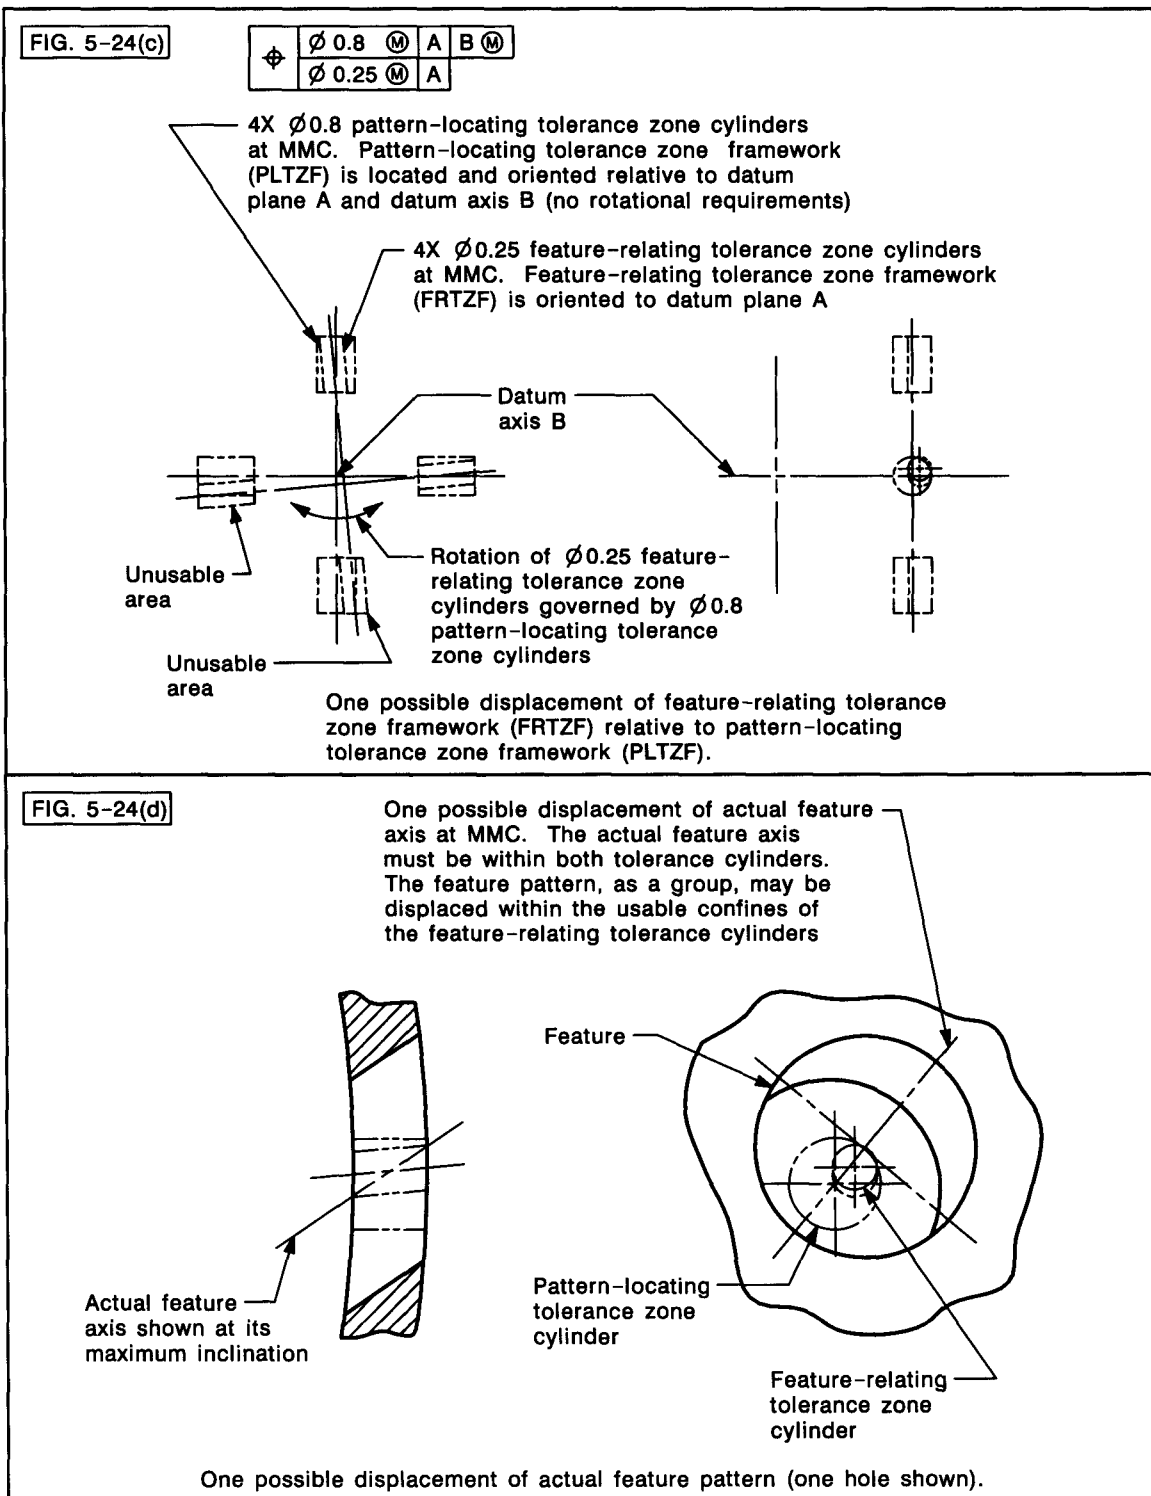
RADIAL HOLE PATTERN LOCATED BY COMPOSITE POSITIONAL TOLERANCING (CONT'D)
